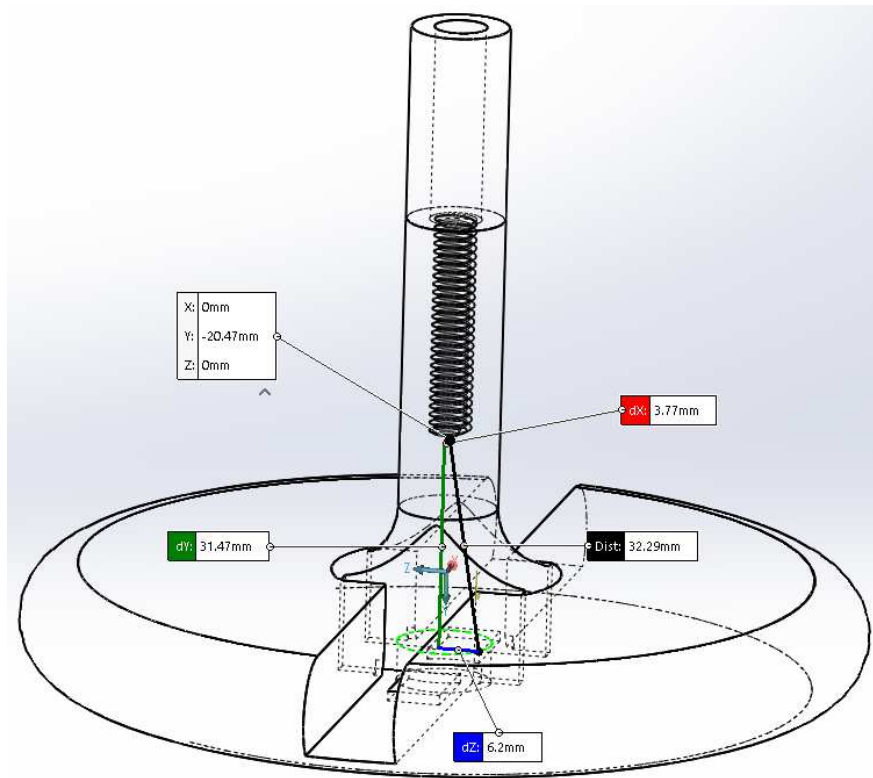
CAD model of spinneret showing the thread required to connect it to the motor, a 31.47mm distance between the end of the shaft of the motor to where the positive high voltage would be; and with compartment to insert the syringe holders.
